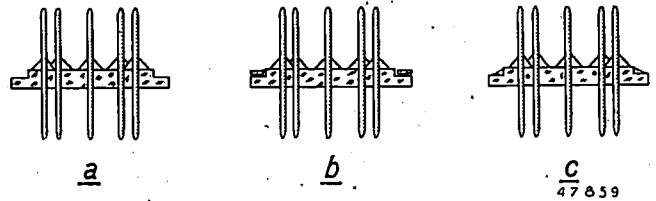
a) Base plate of a radio valve of A series with moulded-in contact pins. Actual size.
